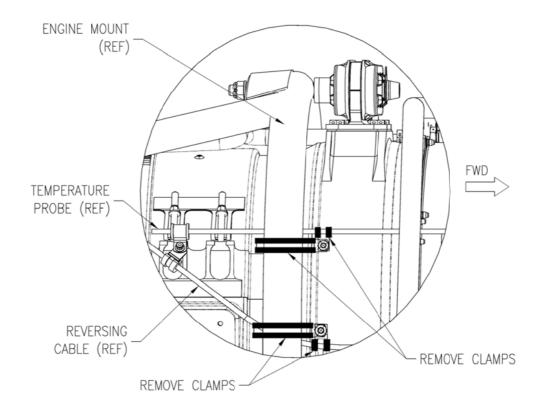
VIEW ON R.H.S OF ENGINE SHOWING REMOVAL OF CLAMPS (IF APPLICABLE)
